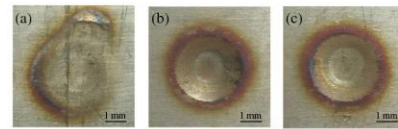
Appearances of the welded joints of SUS316 and SUS425 by all of UT flat and LT different electrode shapes on SUS425 side (a) UT flat - LT flat, (b) UT flat - LT R16, (c) UT flat - LT R30
